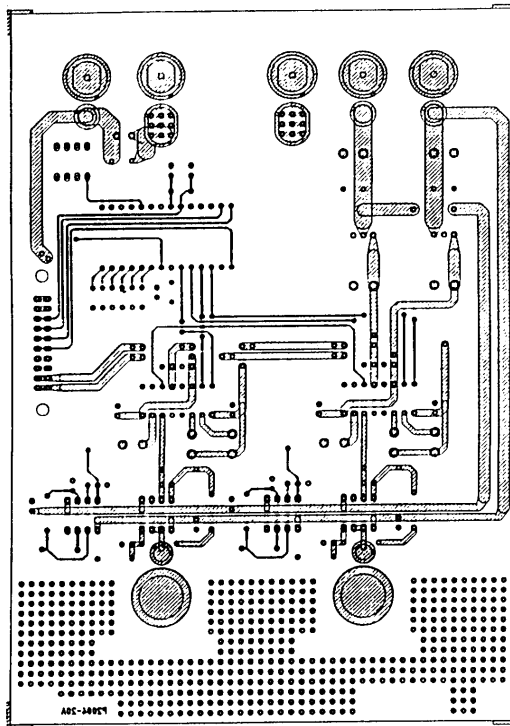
DEM-PCM1702 Board Layout and Component Location.
